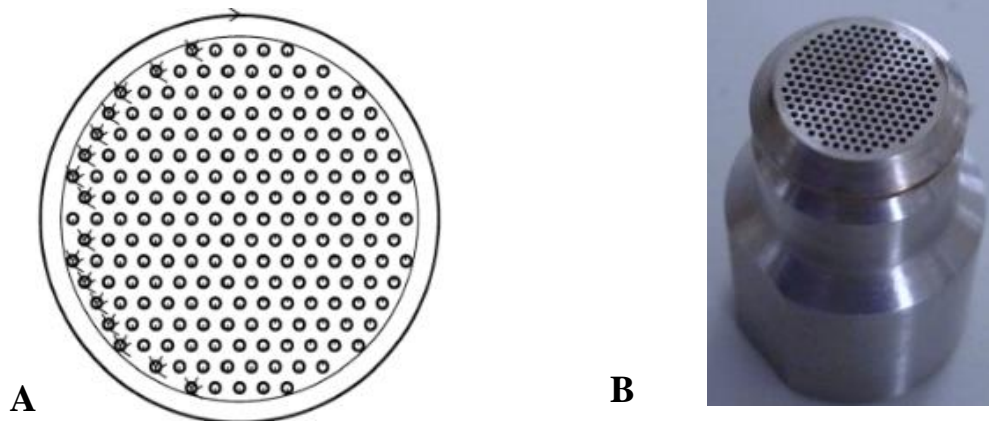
Laser hole-drilled porous platen assembly showing (A) laser hole-drilled porous platen (10mm diameter and 1mm thickness, 300 μ m holes), and (B) porous platen welded into the sleeve.
